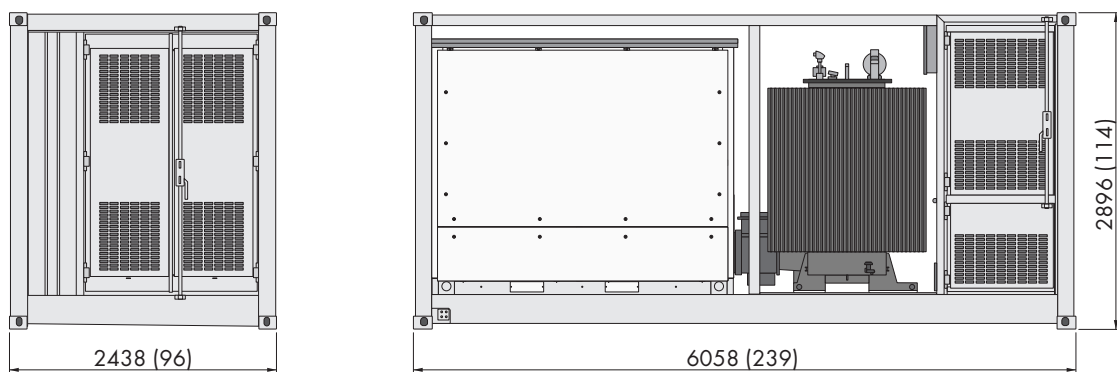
Dimensions of the MV Power Station (Dimensions in mm (in))
